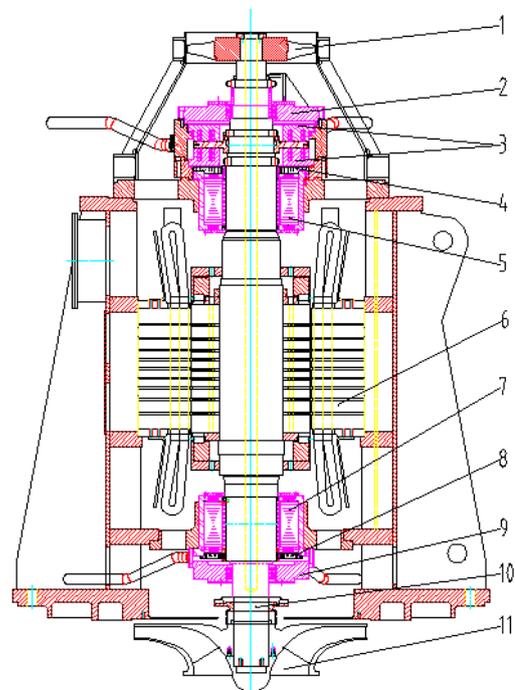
Structural components of the blower. 1, cooling fan; 2, upper auxiliary bearing; 3, axial AMB; 4, upper position sensor; 5, upper radial AMB; 6, electric motor; 7, lower radial AMB; 8, lower position sensor; 9, lower auxiliary bearing; 10, rotor; 11, blower wheel
